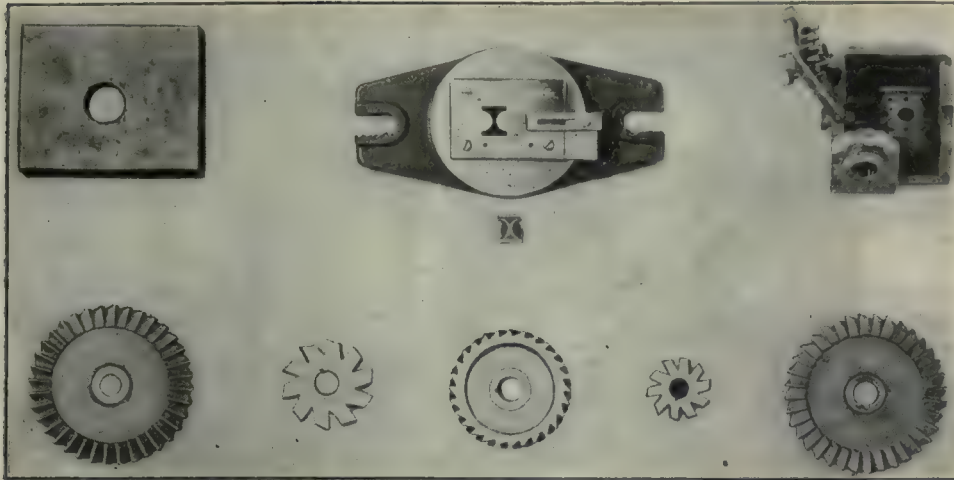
TOOLS TO PRODUCE A DIP BRAZED AIRPLANE FITTING
